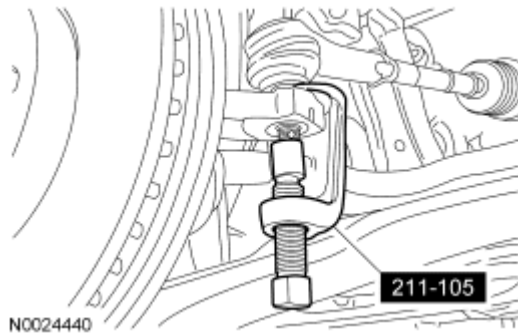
Disconnecting LH And RH Tie Rod End From Steering Knuckle
